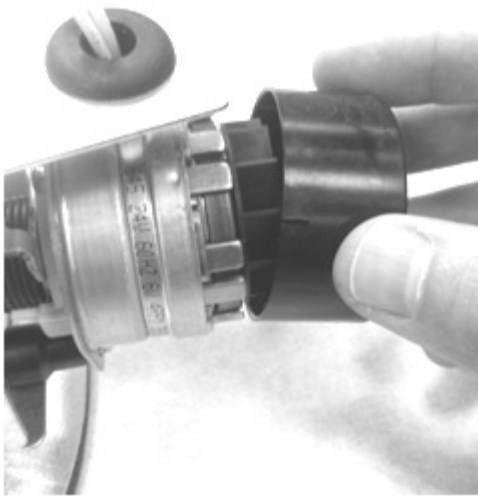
STEP 1 - REMOVE DAMPER PLATE
